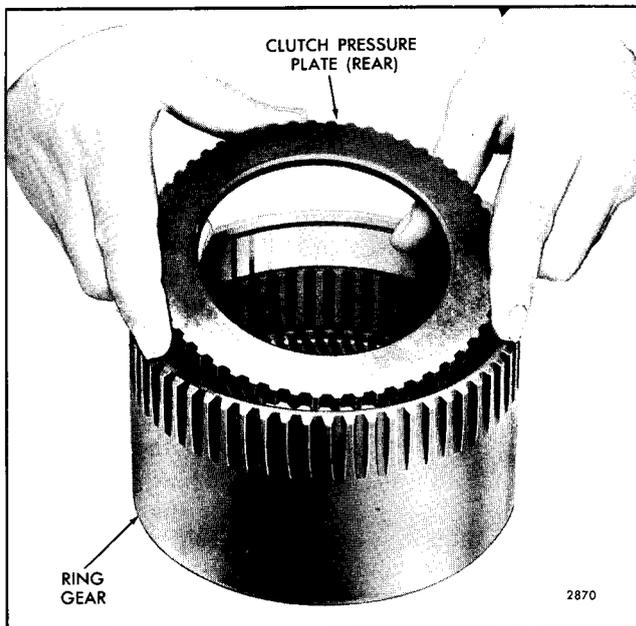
Installing Rear (Forward) Clutch Pressure Plate in Ring Gear
